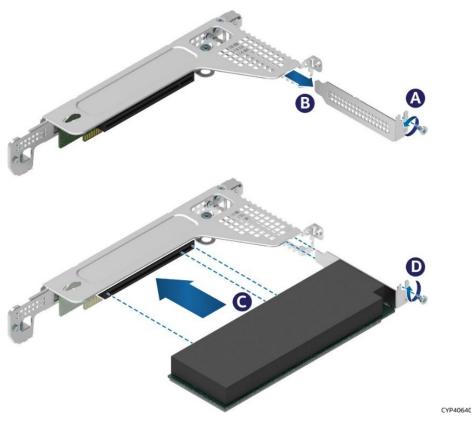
PCIe* Add-in Card Installation for Riser Slot #1 or PCIe* Interposer Riser Assemblies
